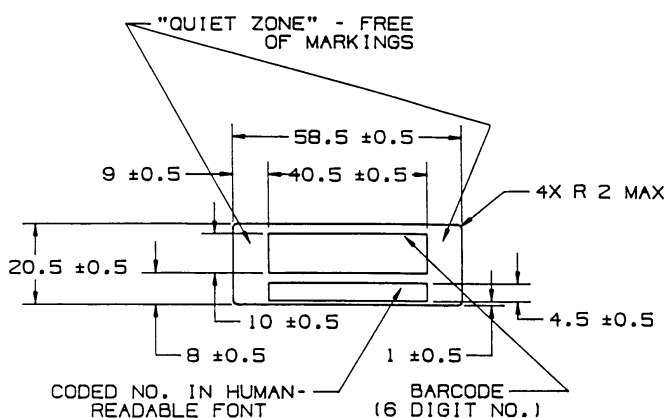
Right-side label information areas, dimensions and tolerances
